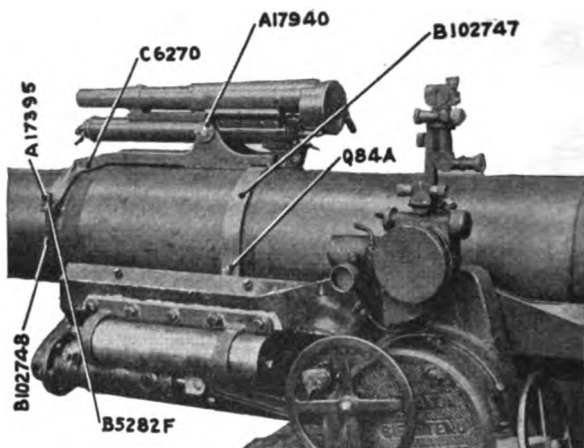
37-mm. subcaliber mount, M1 on 155-mm. gun, M1918
